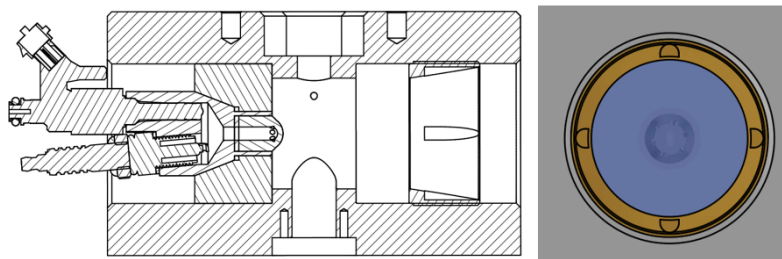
Cross-section of the cylinder head showing the interior view from the side of the cylinder. The pre-chamber system is visible mounted on the cylinder wall.
